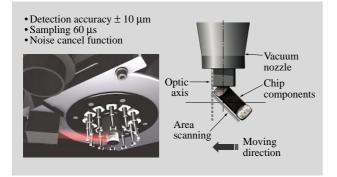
Height to Bottom Surface of the Part Feedback. Checks the presence of components, inspects components, and discards defective parts. Also measures the height to the bottom surface of normal parts, and provides the information as feedback to determine the placement height.
